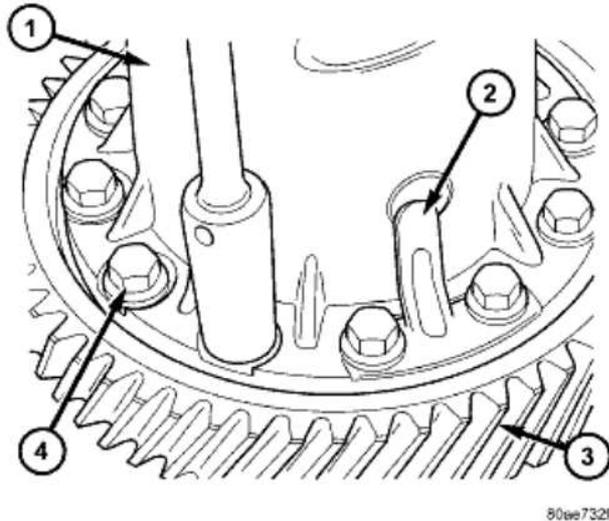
Identifying Ring Gear-To-Case Bolts & Pinion Shaft Retainers
